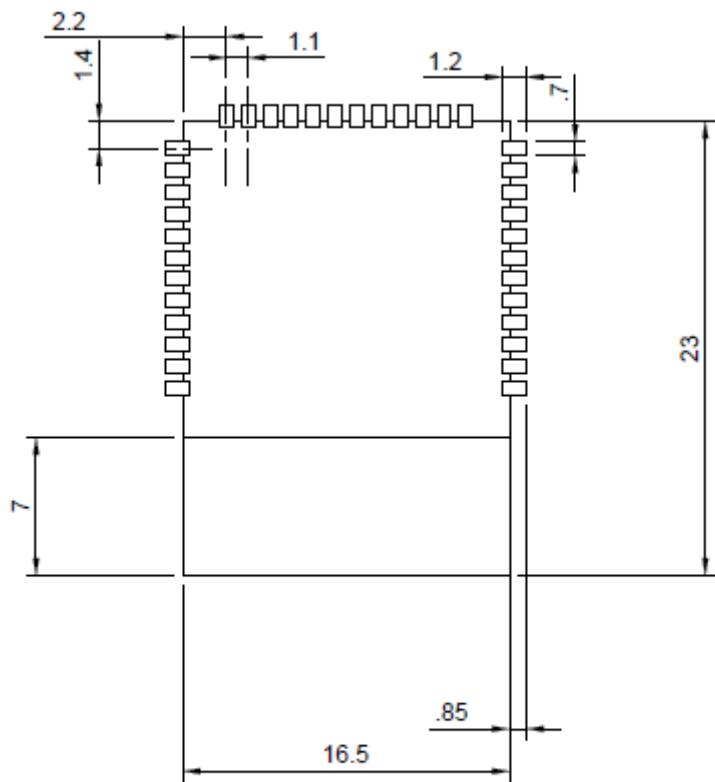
SPNYPM-52832-P02 PCB Footprint and Dimensions
